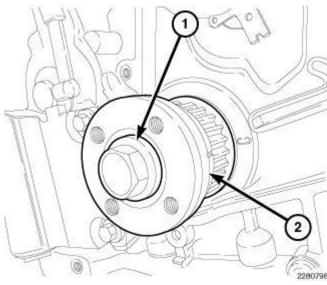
Crankshaft Sprocket And Bolt Courtesy of CHRYSLER LLC
